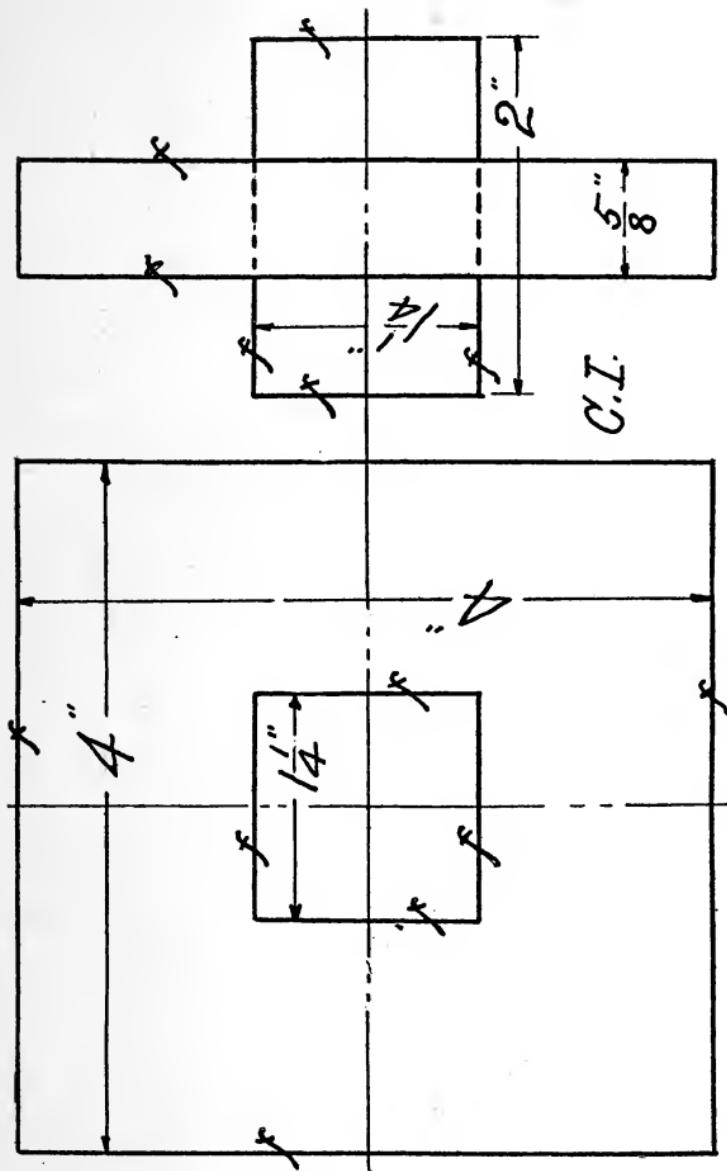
Machine Shop Exercise in Chipping, Filing and Fitting
